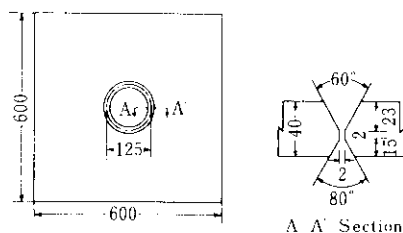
Shape and dimensions of restraint stress-relief cracking test specimen (C Type, NS Navy circular type)
